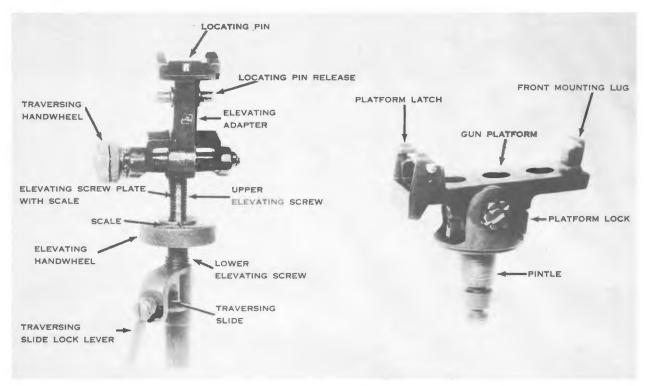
Traversing and elevating mechanism, pintle and platform group.
